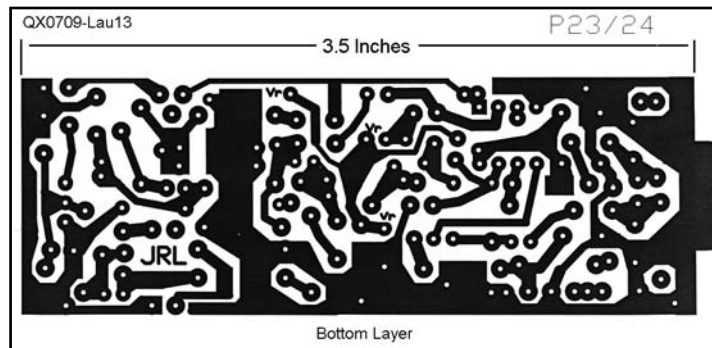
A full-sized etching pattern for the bottom of the circuit board.
